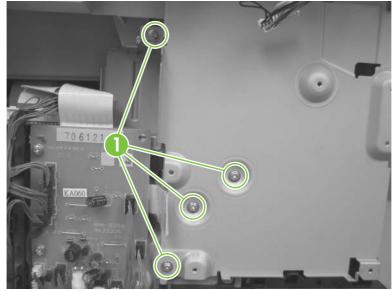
Remove the rear-door rib assembly (duplex product) (3 of 3)
